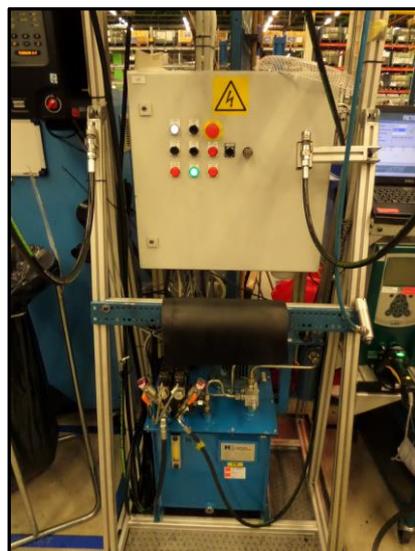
Hydraulic test equipment in Case 2 classified as 7M Dimension Measures and Assembly System Newness Level 2
